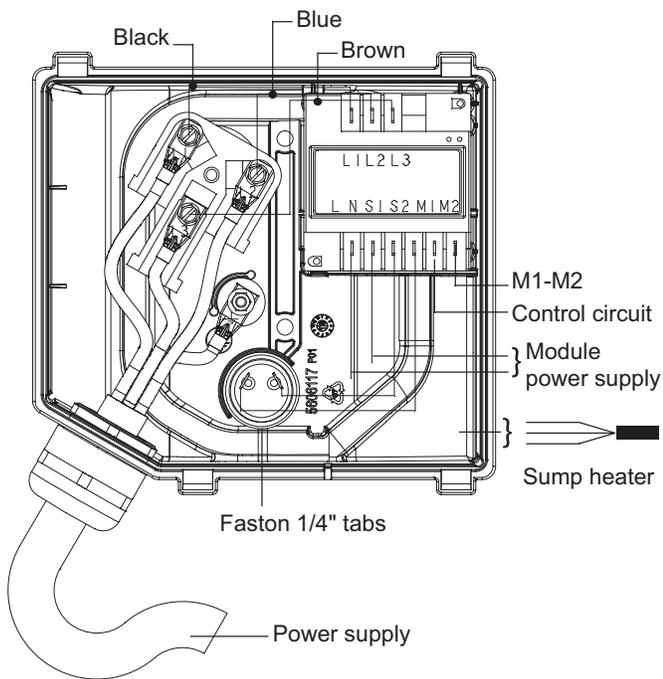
30MP017-046 Compressor Junction Box without Motor Protection Module
